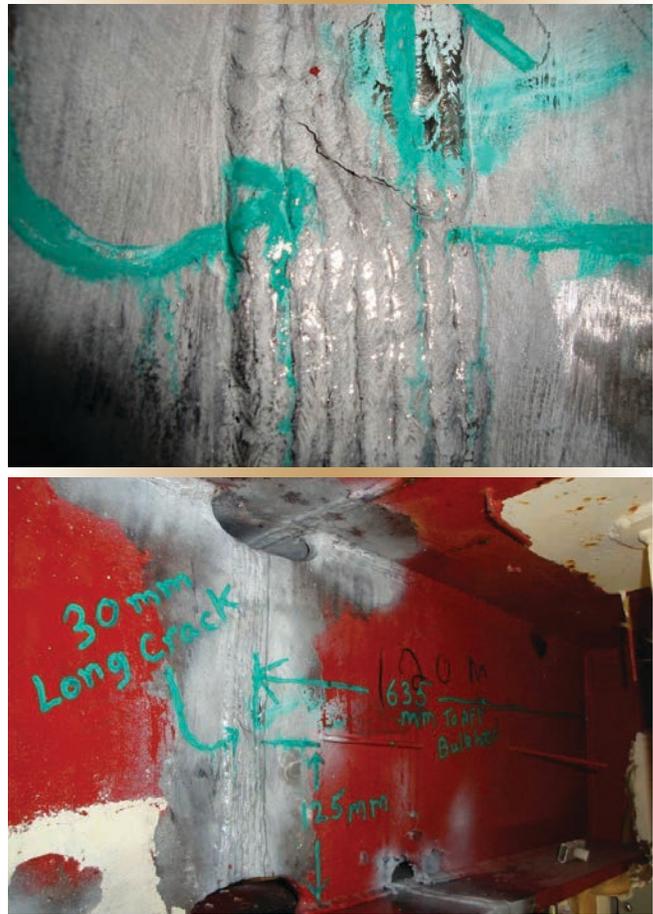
A 30-mm crack found on the web of a girder aboard HMCS *Ville de Québec* (FFH-332). (Huang, 2021)
